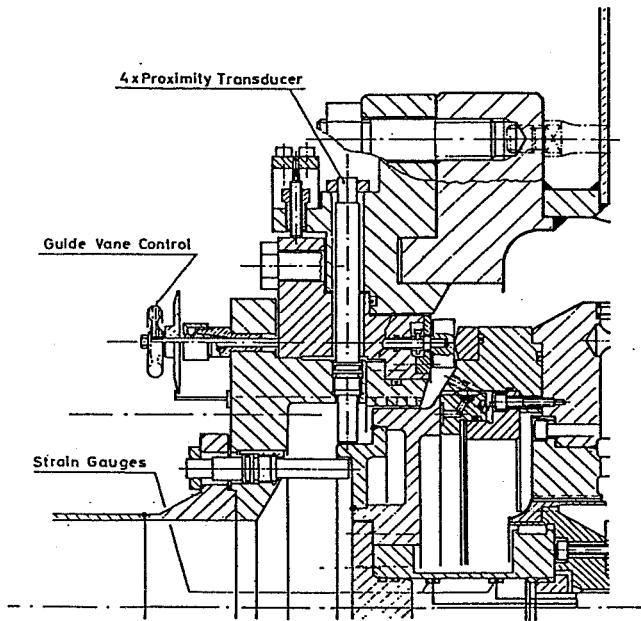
Rotor, seal and guide vanes, hydrostatic balancing seal.
